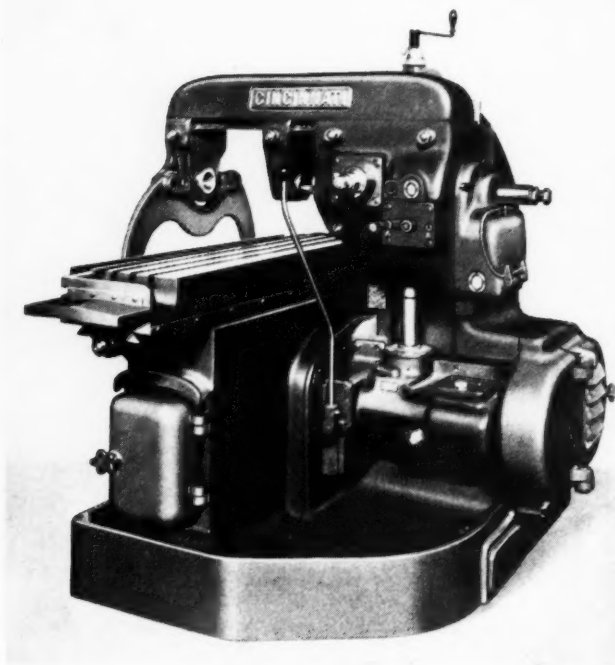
Rear View of Milling Machine Shown in Fig. 1
